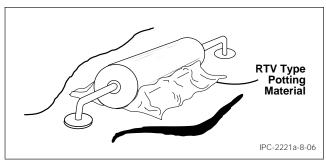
Adhesive-Bonded Axial-Leaded Component
